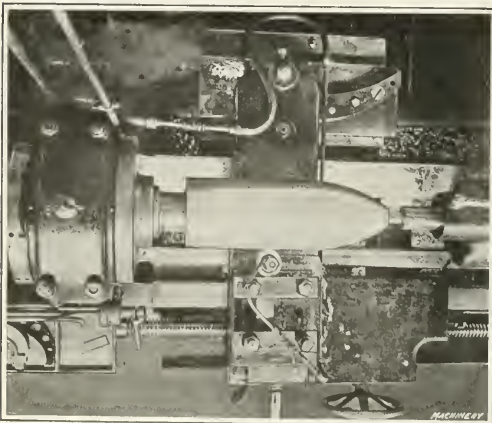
Close View of Lathe tooled up for performing Finish-turning Operation
